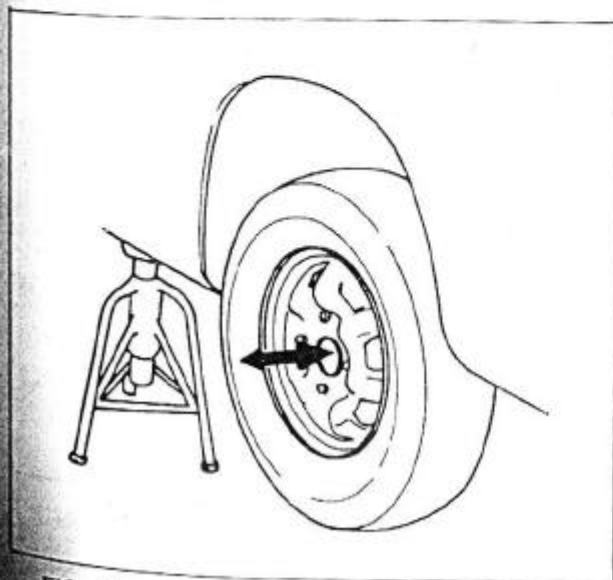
E — 8 CLEARANCE CHECK OF REAR WHEEL BEARING
